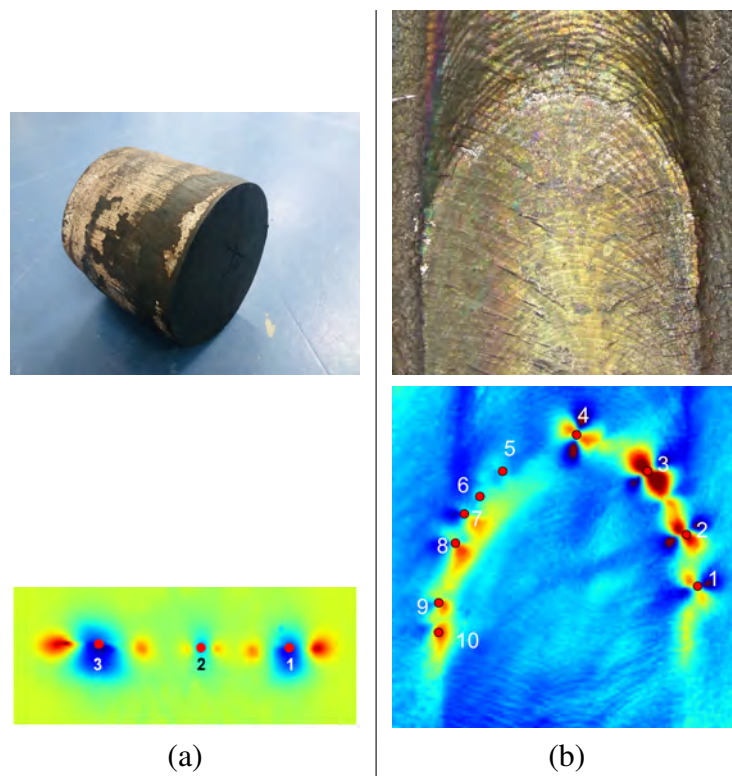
Natural cracks samples. Upper row upper photograph, lower phase image with labelled crack centers. (a) Steel mooring chain fragment. (b) Hayness TIG welded coupon.
